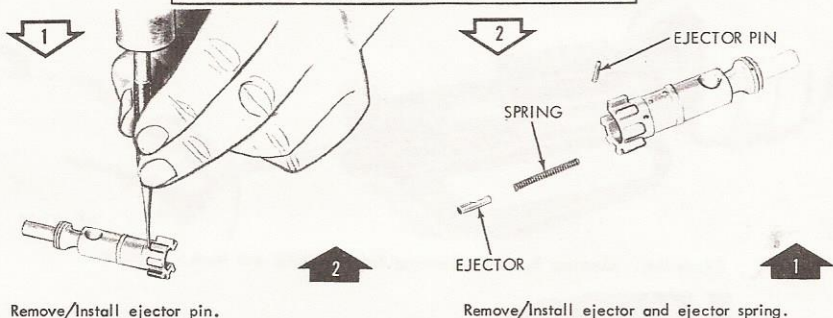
A. Disassembly/Assembly of Bolt Assembly.
